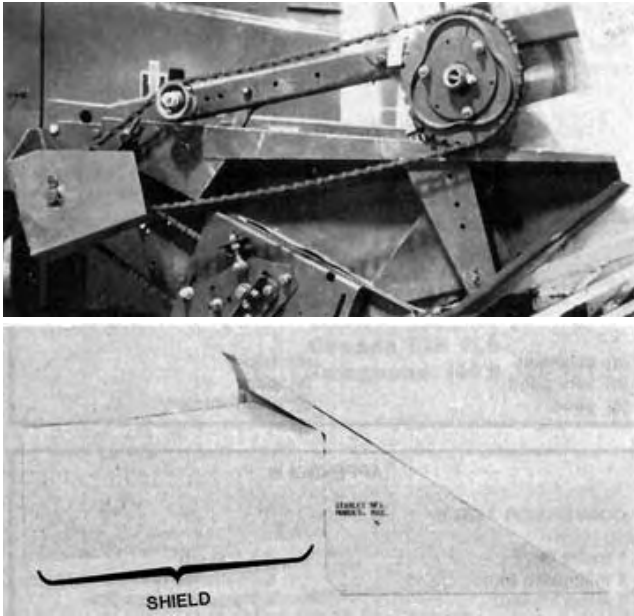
Exposed Reel Drive (top) and PAMI Reel Drive Shield (bottom).
